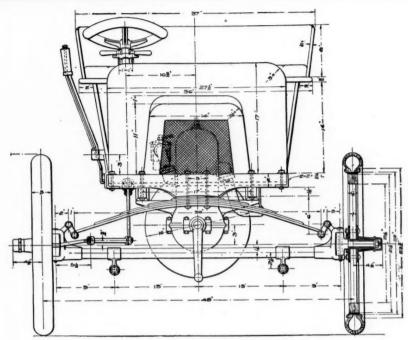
END ELEVATION OF COMPLETE MACHINE.
